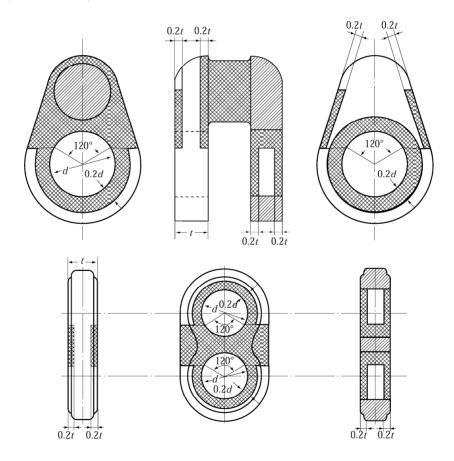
Zones where Repairs of Welding should not be carried out (Cross hatching zone)
